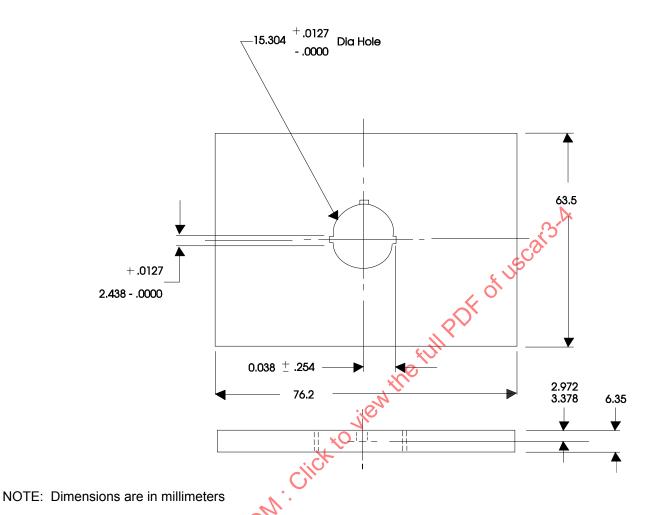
Pin Removal Test Plate (B-1, B-2, and C-2 Base Types)
